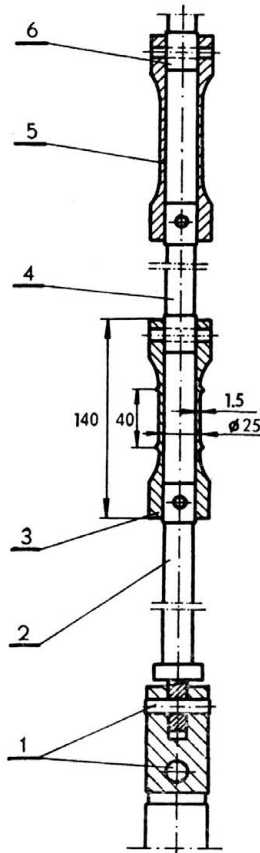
Mounting of specimen: 1—universal joint, 2—lower loading rod, 3—specimen, 4—upper loading rod, 5—load cell, 6—torque disc shaft.
